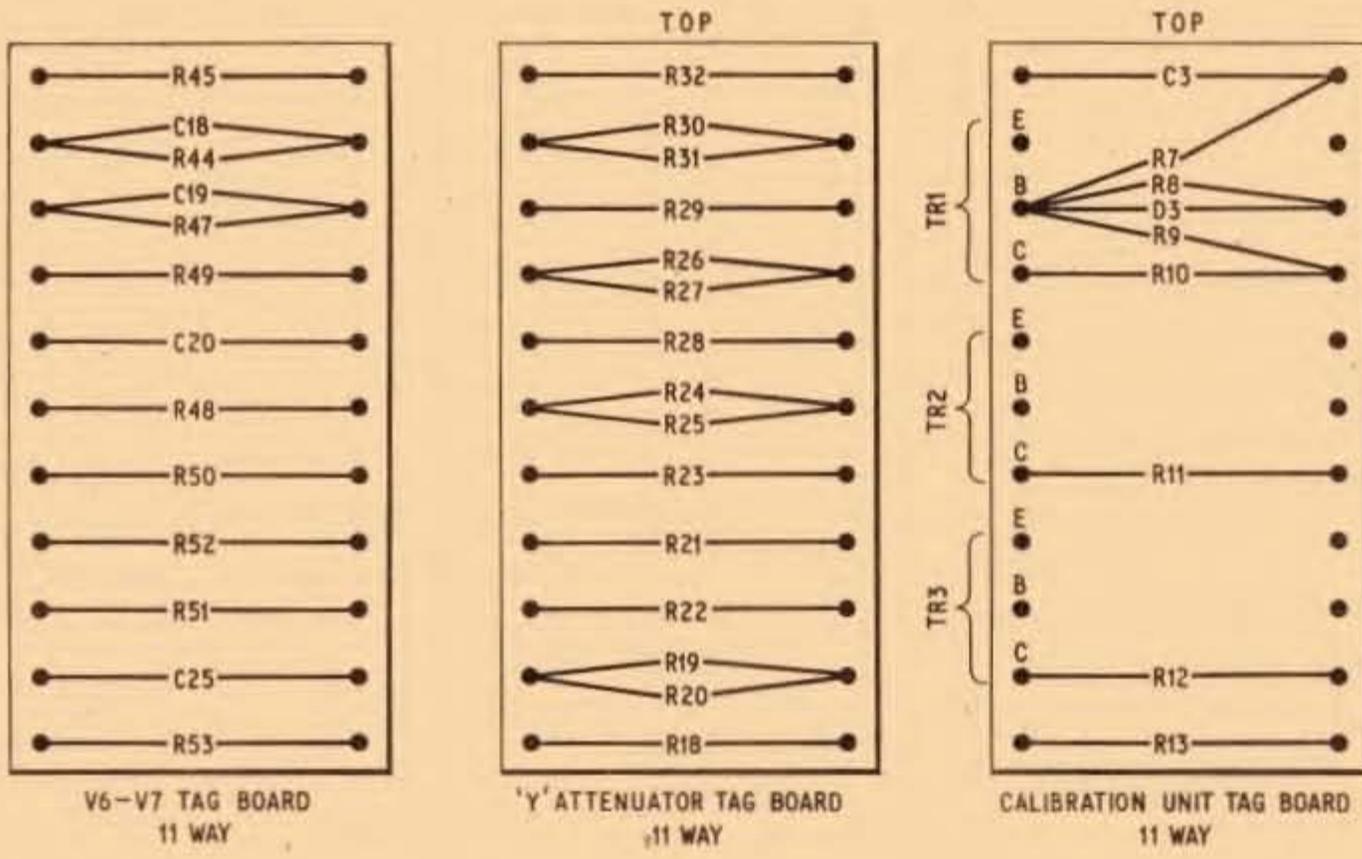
Suggested arrangement of components on the various tag boards. Components should be assembled and wired up on these boards prior to the latter being fitted in position on the chassis
